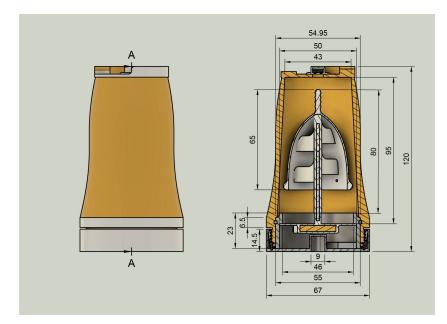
Tulipal 2in1 device main dimensions (in mm).
